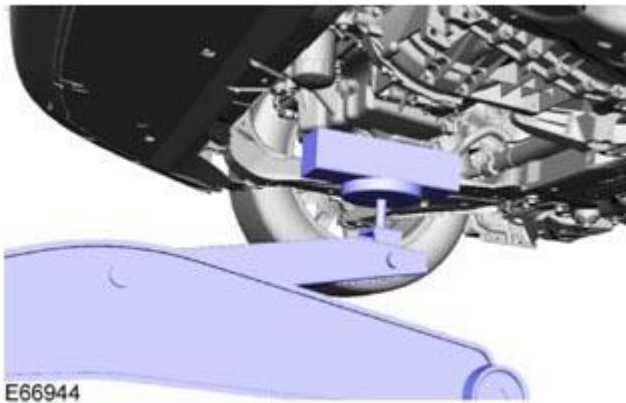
Supporting Engine Using Floor Jack And Block Of Wood
